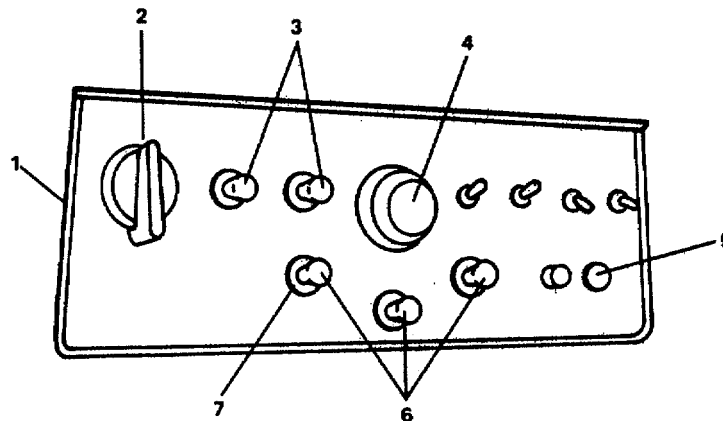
Replace Repair Electronic Module Assembly (Sheet 1 of 2).
